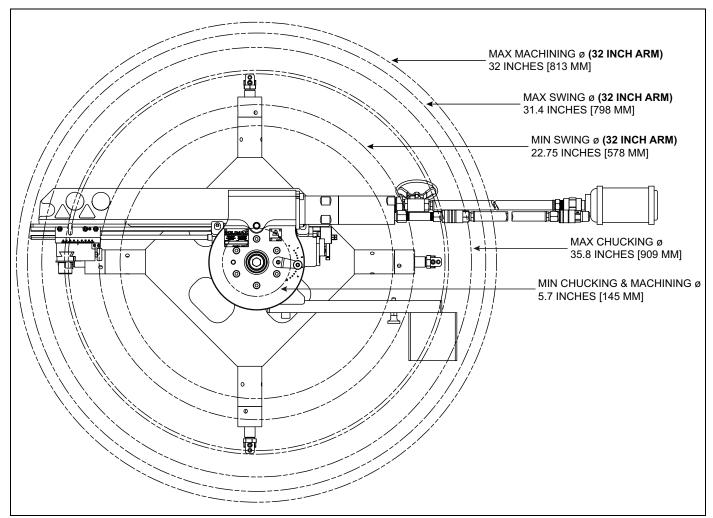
DIMENSIONS FOR 32" (813 MM) MACHINING ARM
